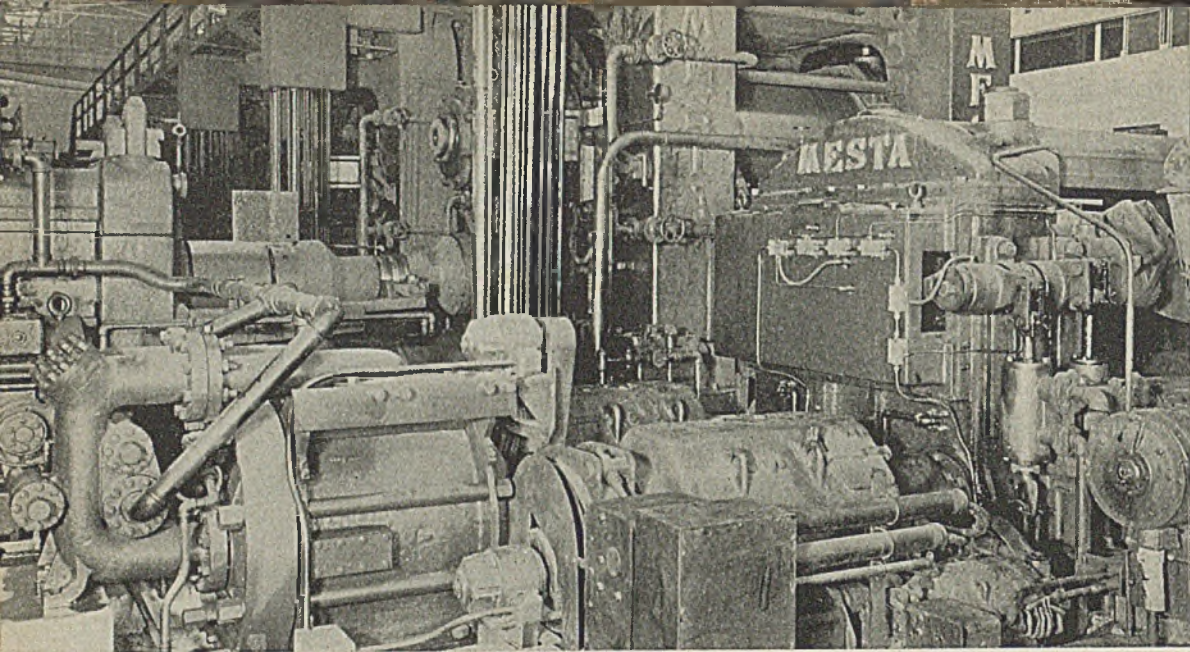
Finishing stand and flying shear from drive end showing shear motors, pinch roll reset motor and two pilot generators
